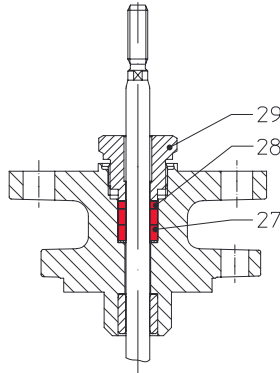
; Nominal diameter DN100; Nominal pressure PN40; Body material 1.0619+N; Isolation plug; Stem sealing PTFE-V-ring unit; ARI-PREMIO 12kN
